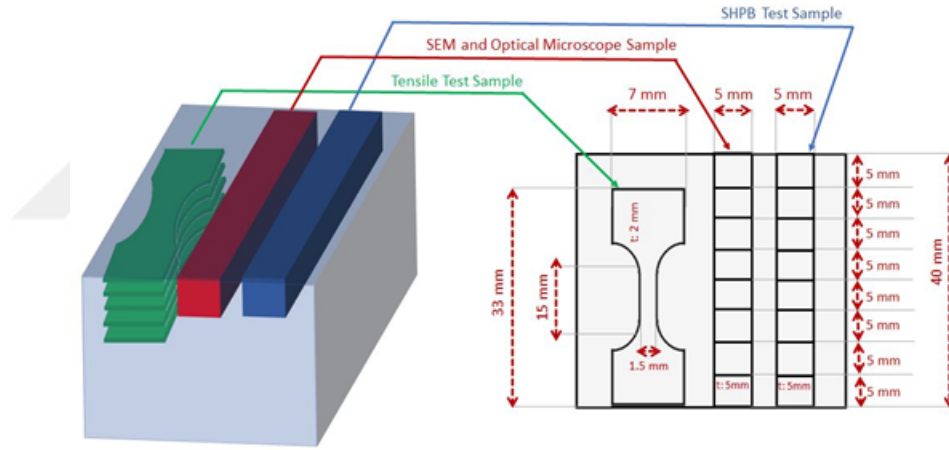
Schematic drawing showing the areas where the samples used in structural and mechanical examinations were taken from the forging and the dimensions of these samples
